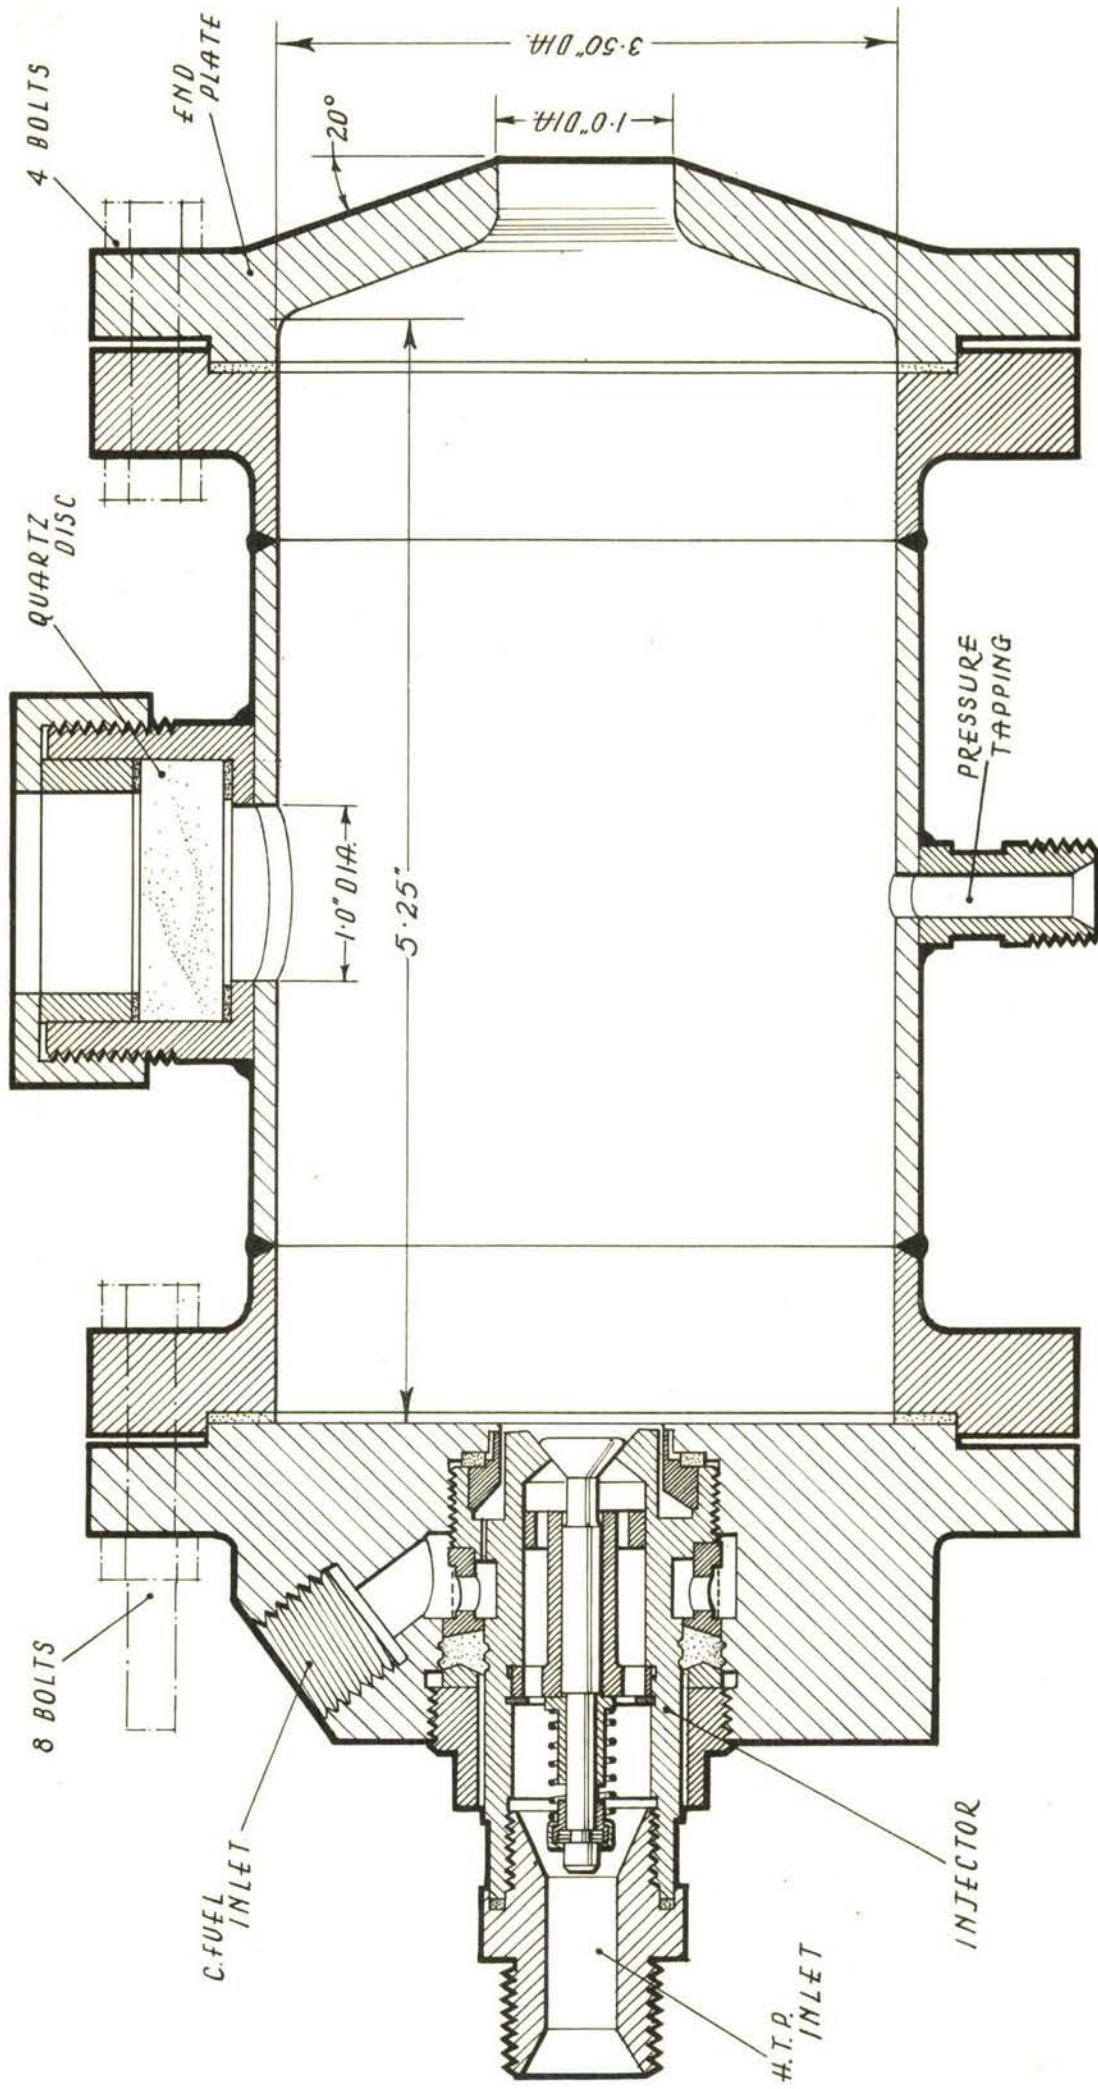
INJECTION HEAD AND COMBUSTION CHAMBER. L* 65" APPROX.
